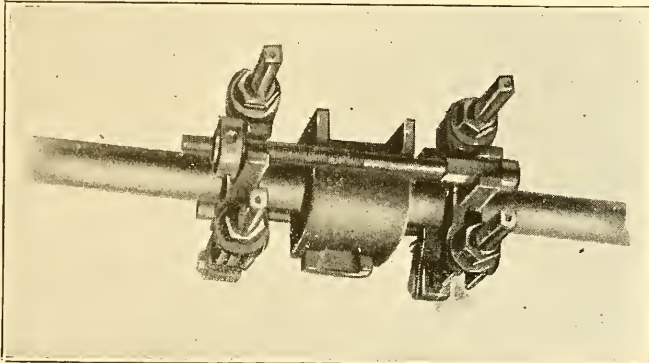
Mold Fully Assembled for Weld.
